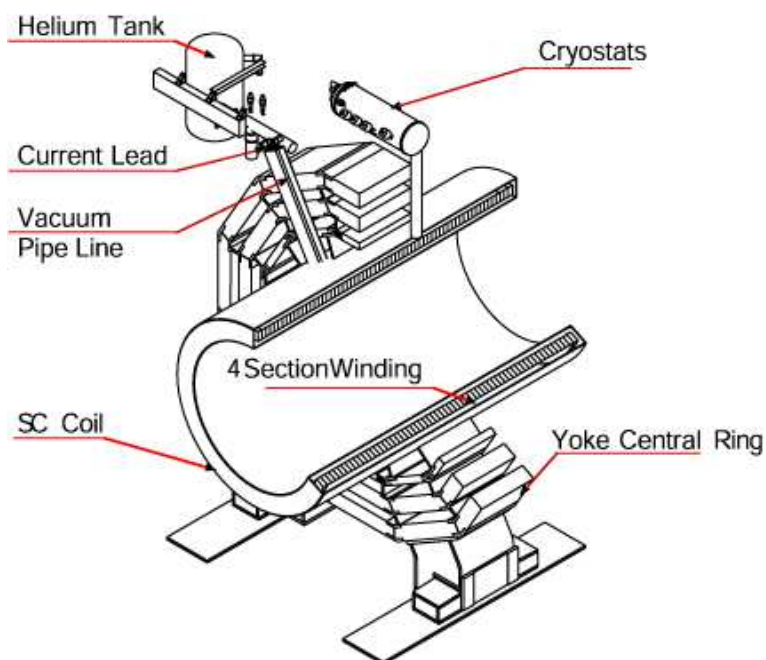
A open view of the CMS magnet system. The superconducting coil is placed inside a vacuum tank.
